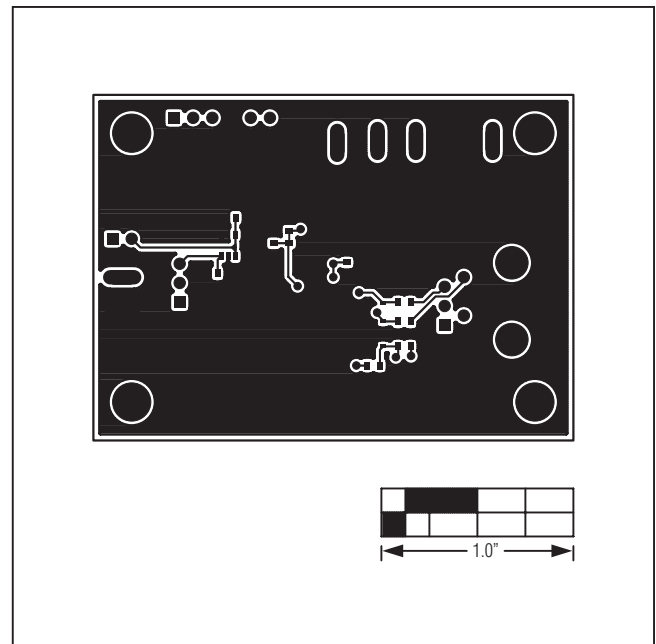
MAX17048X/MAX17049X EV Kits PCB Layout—Solder Side
